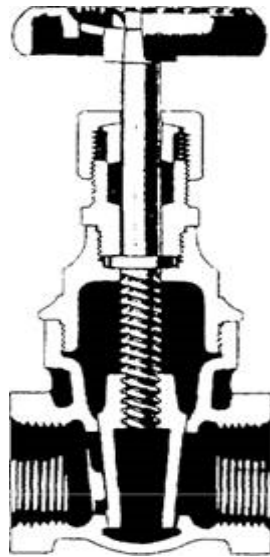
Cutaway view of a gate valve (non-rising-stem type).
